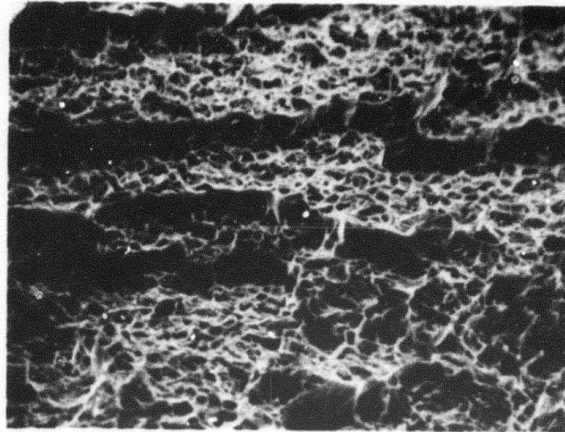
SEM micrographs of fusion zone fracture I-706, tensile specimen 7211 tested at 4.2°K
